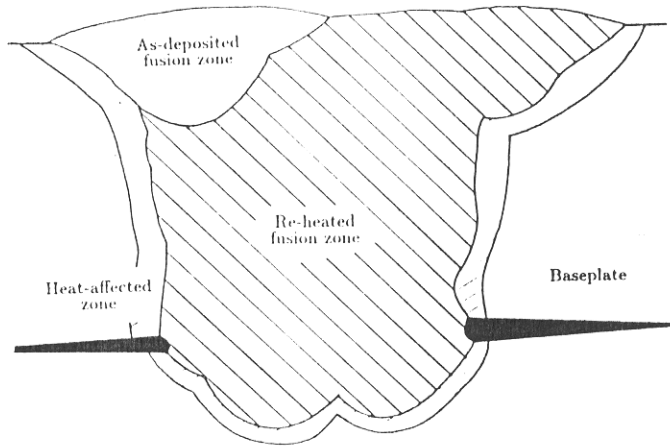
Schematic diagram of possible positions of the as-deposited weld metal, the re-heated weld metal and the heat-affected zone, in a multipass weld.
